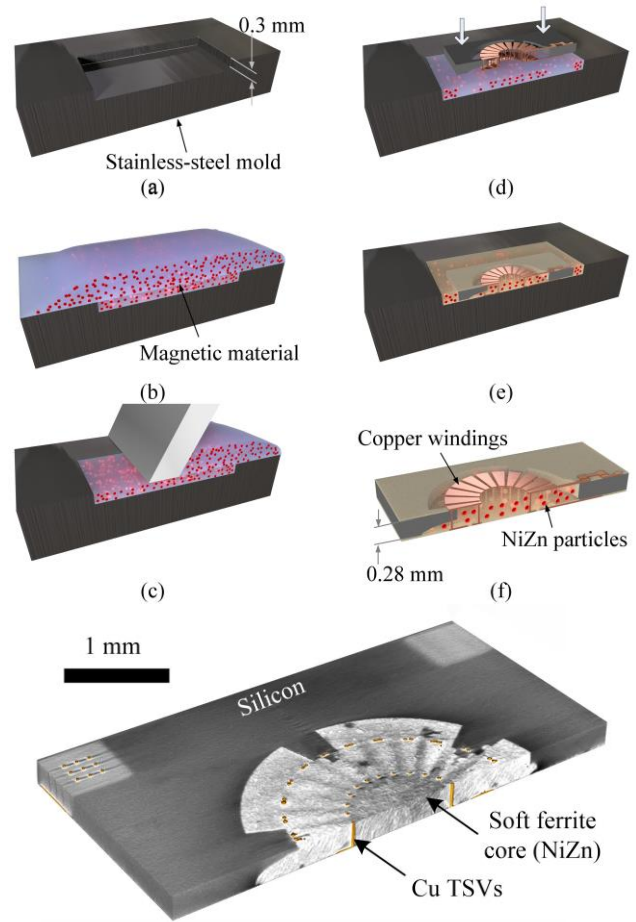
A manual casting process for magnetic core fabrication. (a) Step 1: a stainless-steel mold with a 0.3-mm-deep, 6 x 6 mm cavity, (b) Step 2: casting of the composite material into the mold, (c) Step 3: a planarization step is done to get a uniform composite layer with a thickness of 0.3 mm, which is designed to be slightly thicker than the inductor thickness of 280 μm to avoid overfilling of the core material over the copper windings. (d) Step 4: immersing of the air-core inductor into the composite layer. (e) Step 5: the core is cured at 75 °C for 3 hours, (f) Step 6: the inductor is released from the mold. (g) A cross-sectional micrograph of a fabricated TSV magnetic-core toroidal inductor scanned by an X-ray inspection system XD7600NT (Nordson DAGE Corp., UK).
